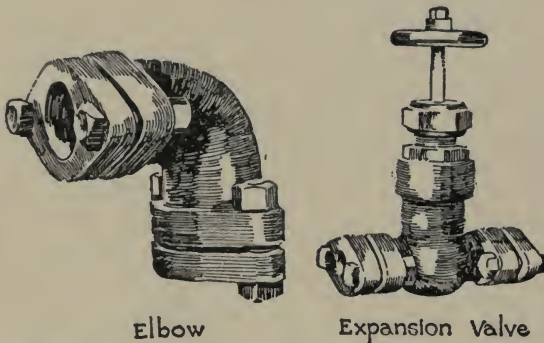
Ammonia fittings: the elbow and the expansion valve
